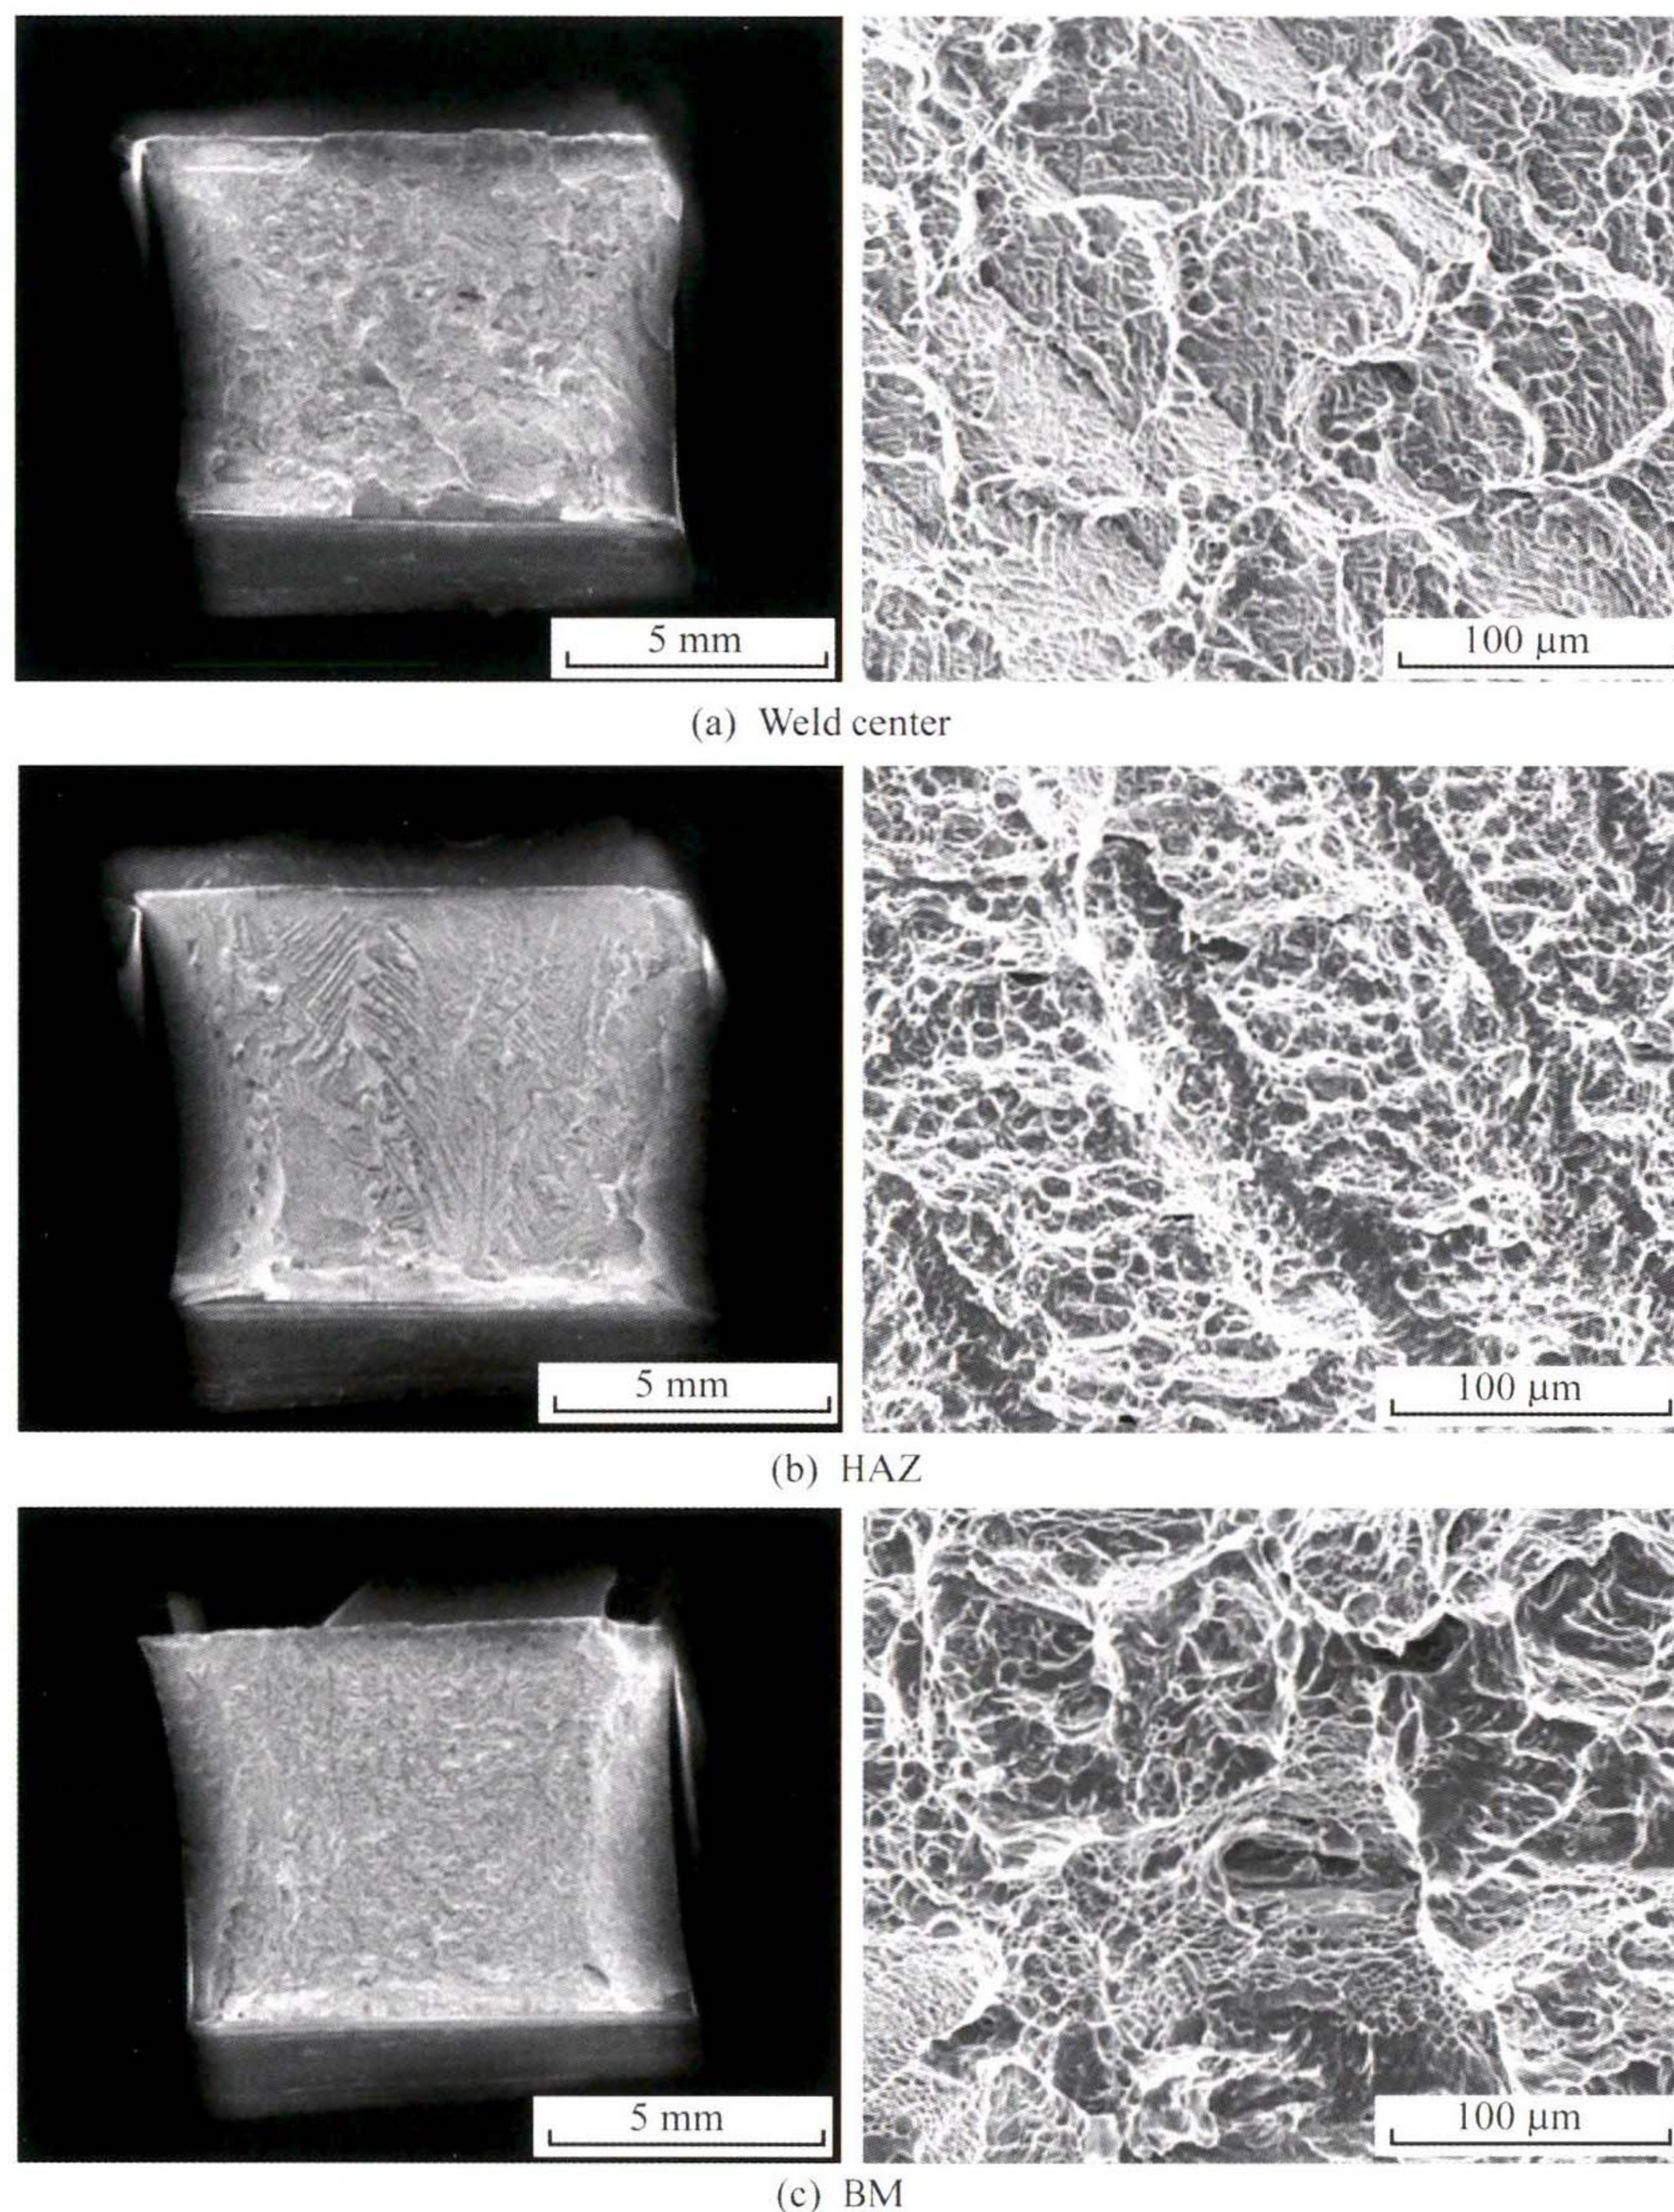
Fracture surfaces of impact samples from the welded joint
